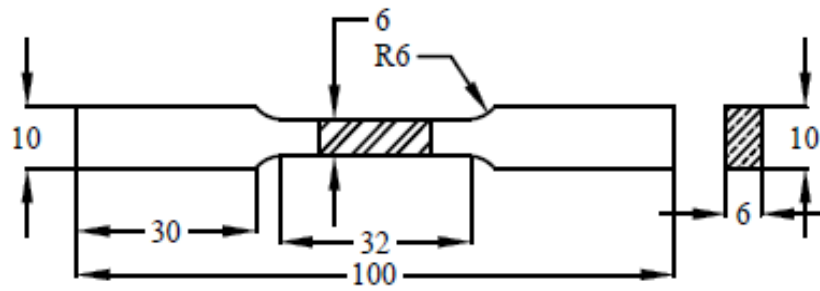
Schematic showing the specimens taken from welded plates
